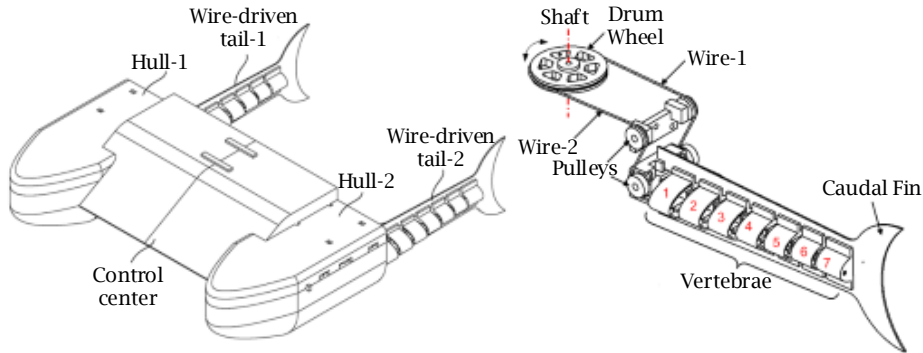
Fish-like double hulls boat: (a) CAD model, (b) Mechanism of the wire-driven tail [4].
